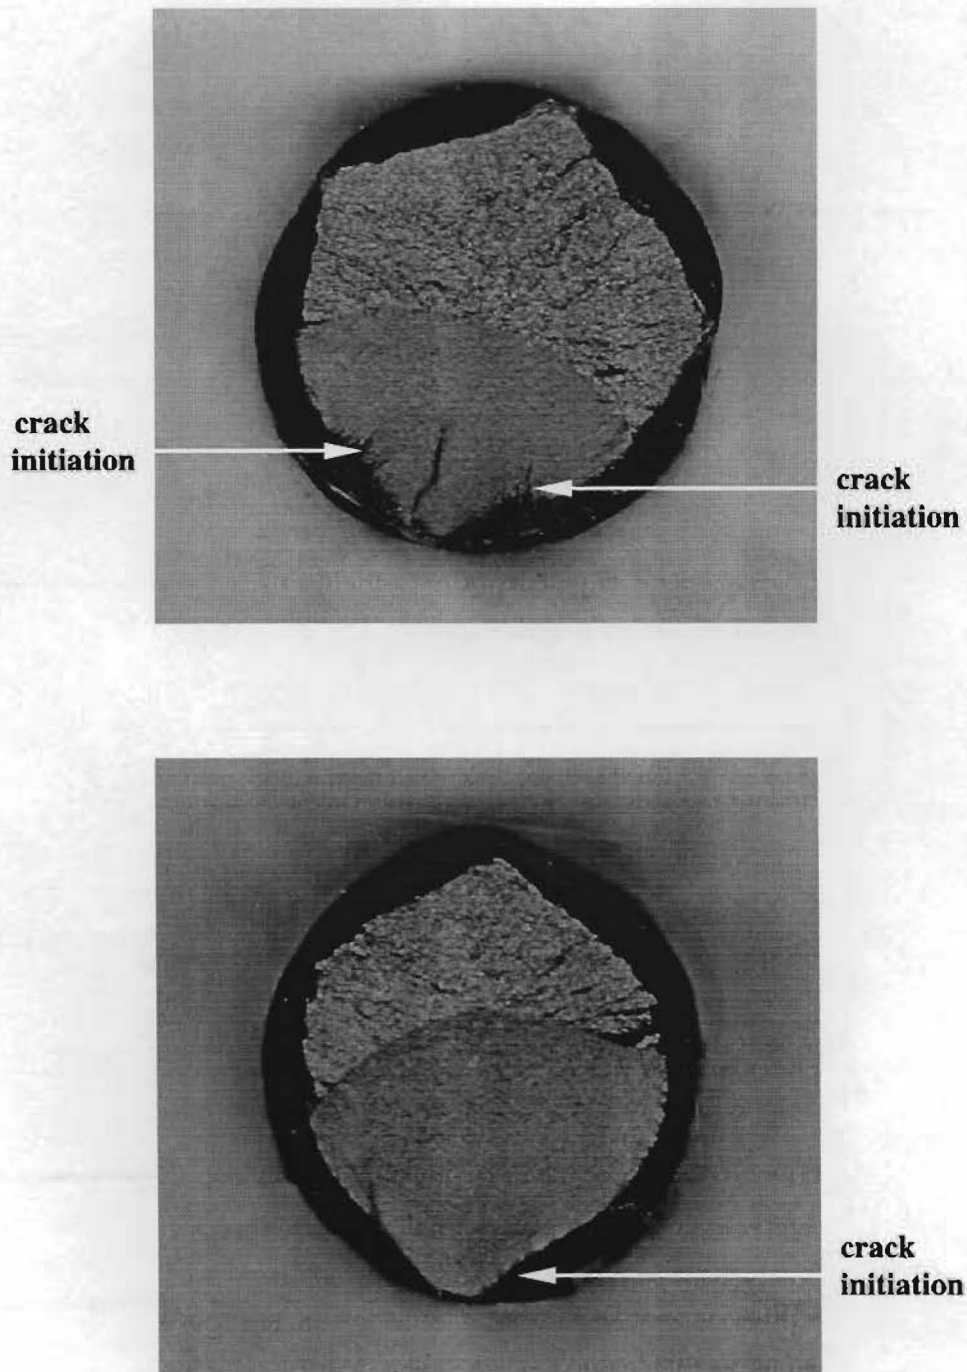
Fatigue Crack Surfaces on Ch5S60 Bars
